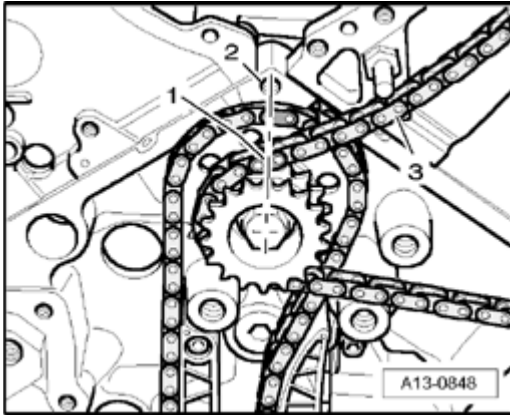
Copper-Colored Chain Link, Threaded Hole & Camshaft Timing Chain
